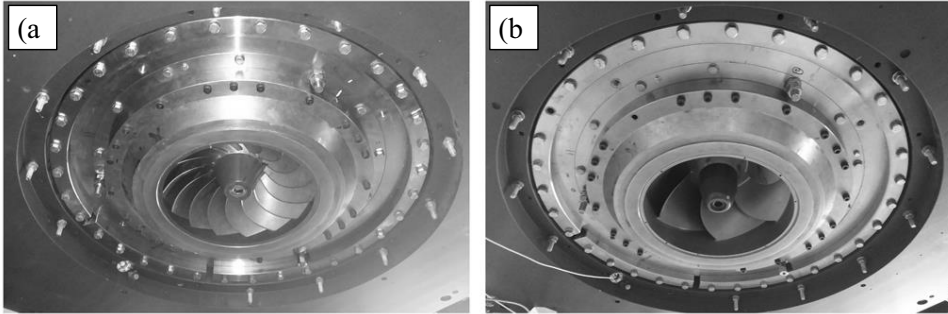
Outlet view of both runners during installation, before the draft-tube cone is being connected. a) Francis turbine F99 with 15 full-length blades and 15 splitter blades, b) Reversible pump-turbine RPT with 6 full-length blades.
